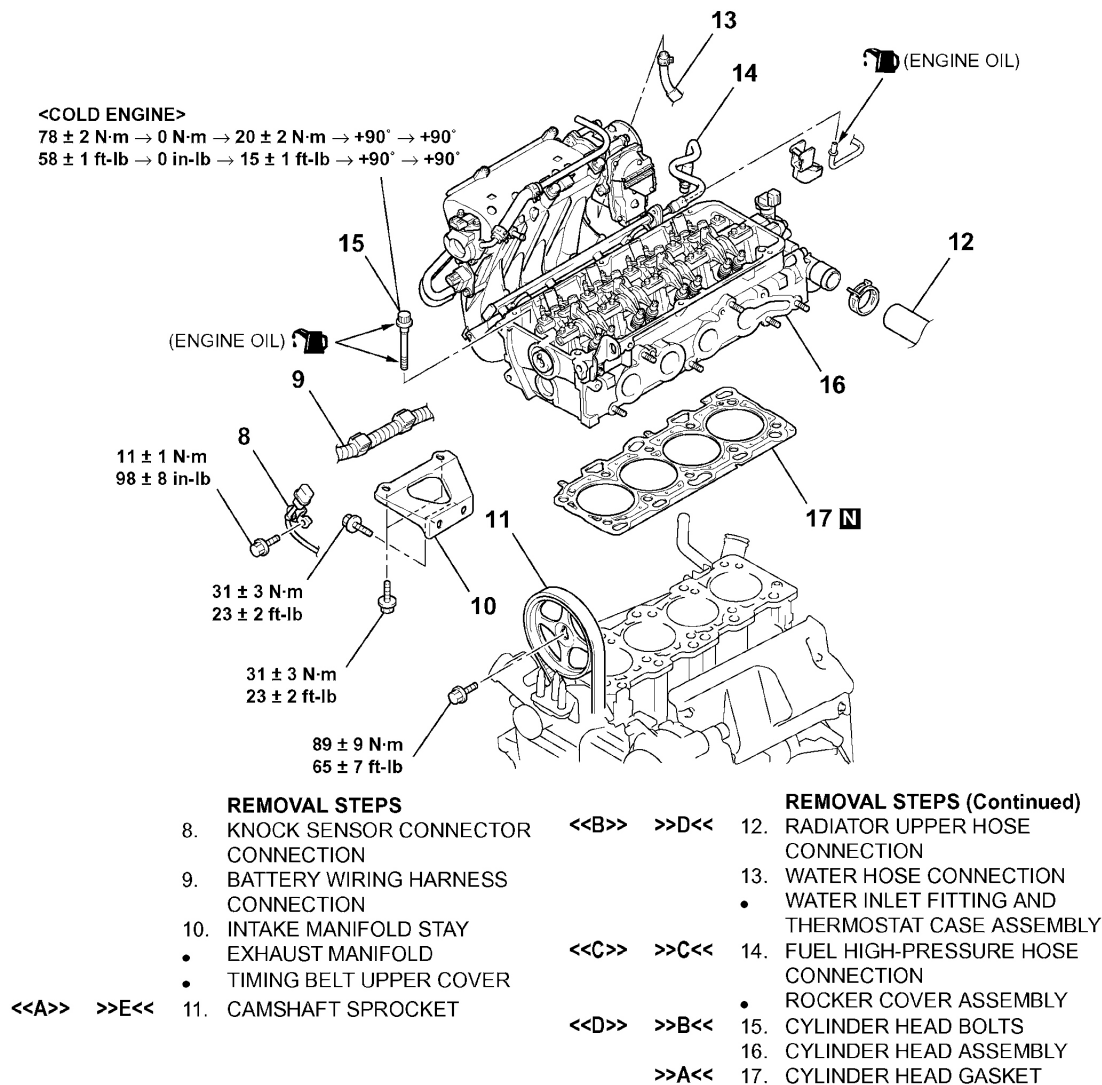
Removing Cylinder Head Gasket (2 Of 2)
